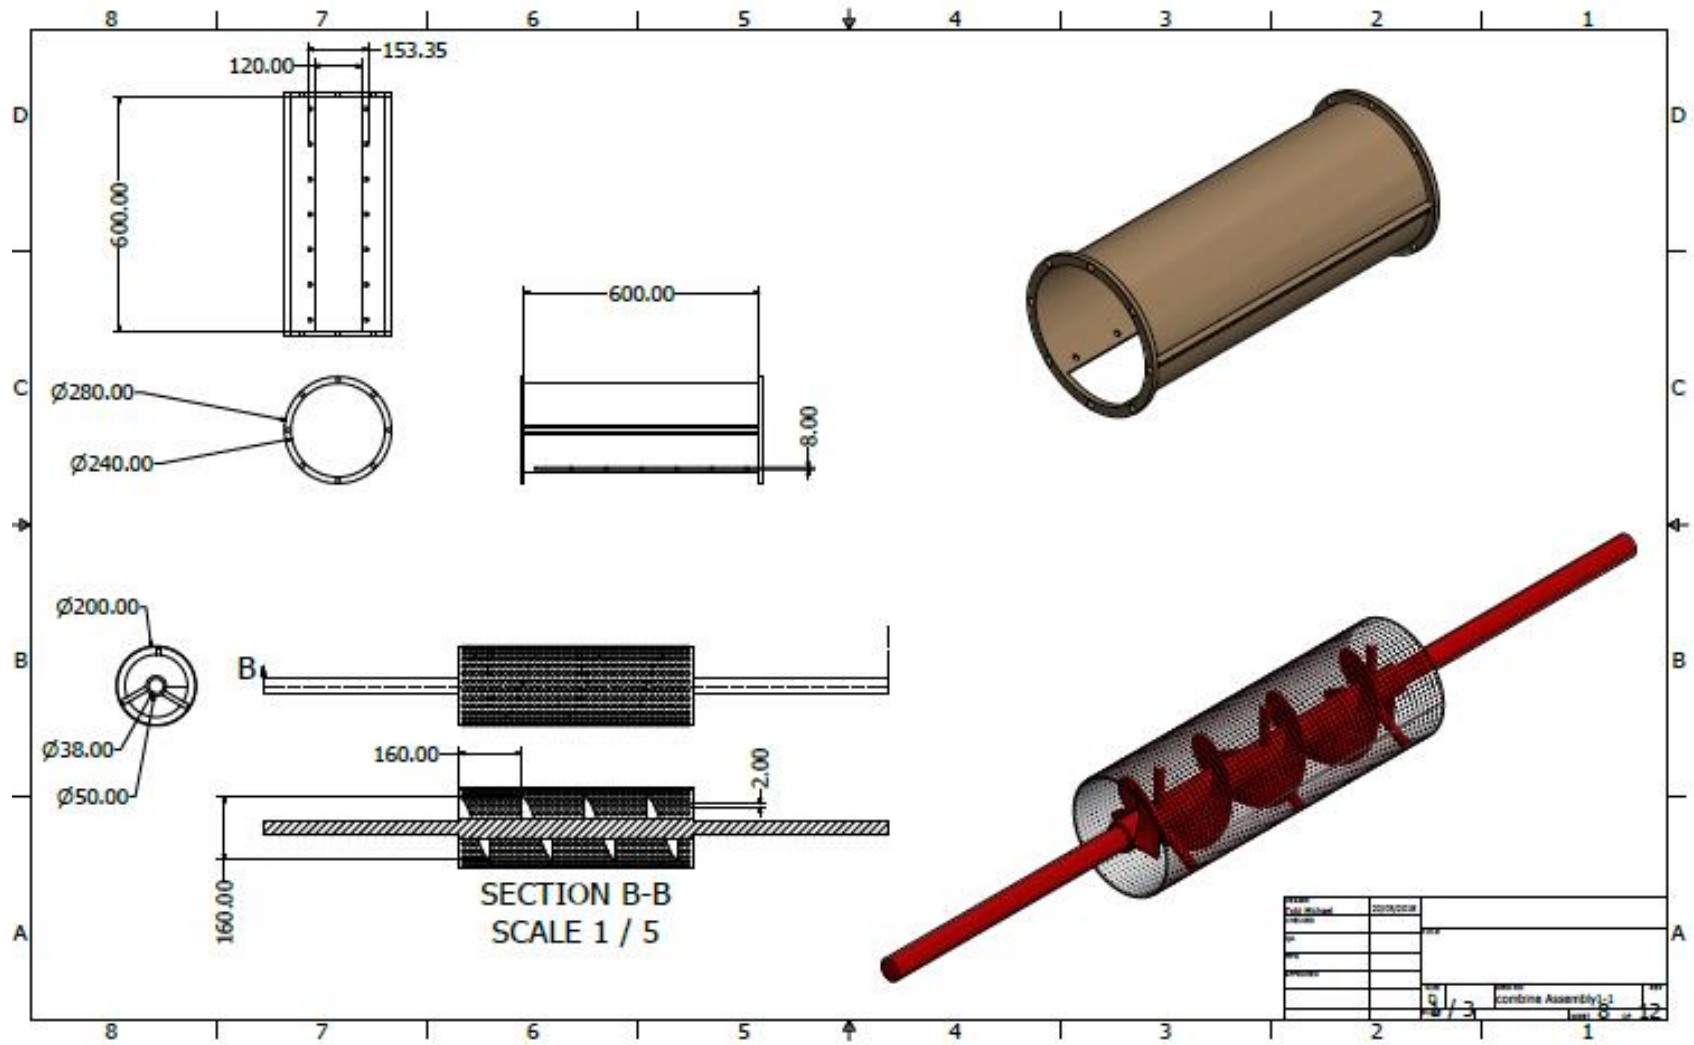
Design drawing of the second separating unit sieve drum and screw conveyor.
